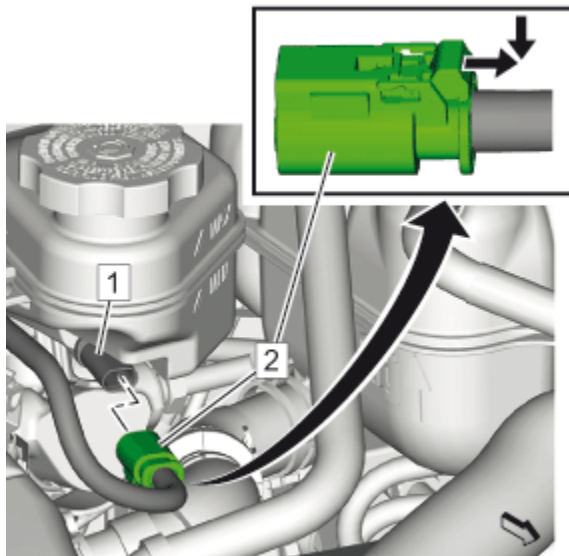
Electrical Connector And Brake Fluid Level Sensor
